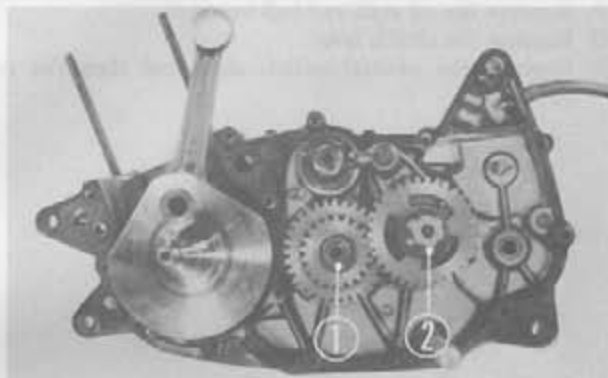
① 25mm thrust washer ② 23mm thrust washer
